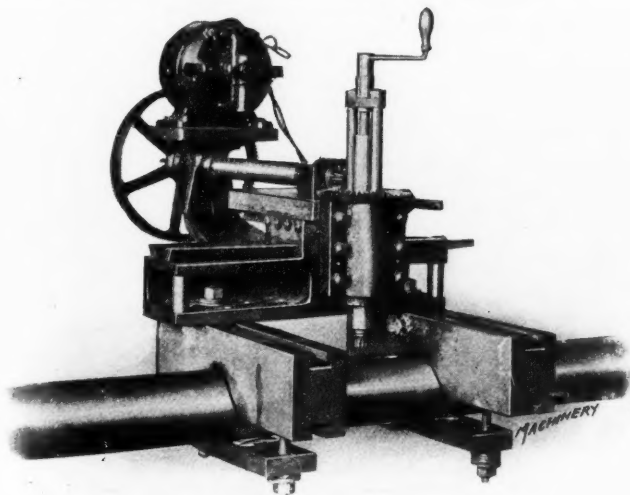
Pedrick Machine milling a Keyway in a Shaft
